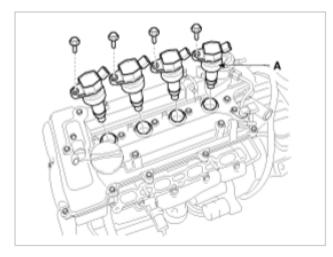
Identifying Ignition Coils Courtesy of HYUNDAI MOTOR AMERICA
